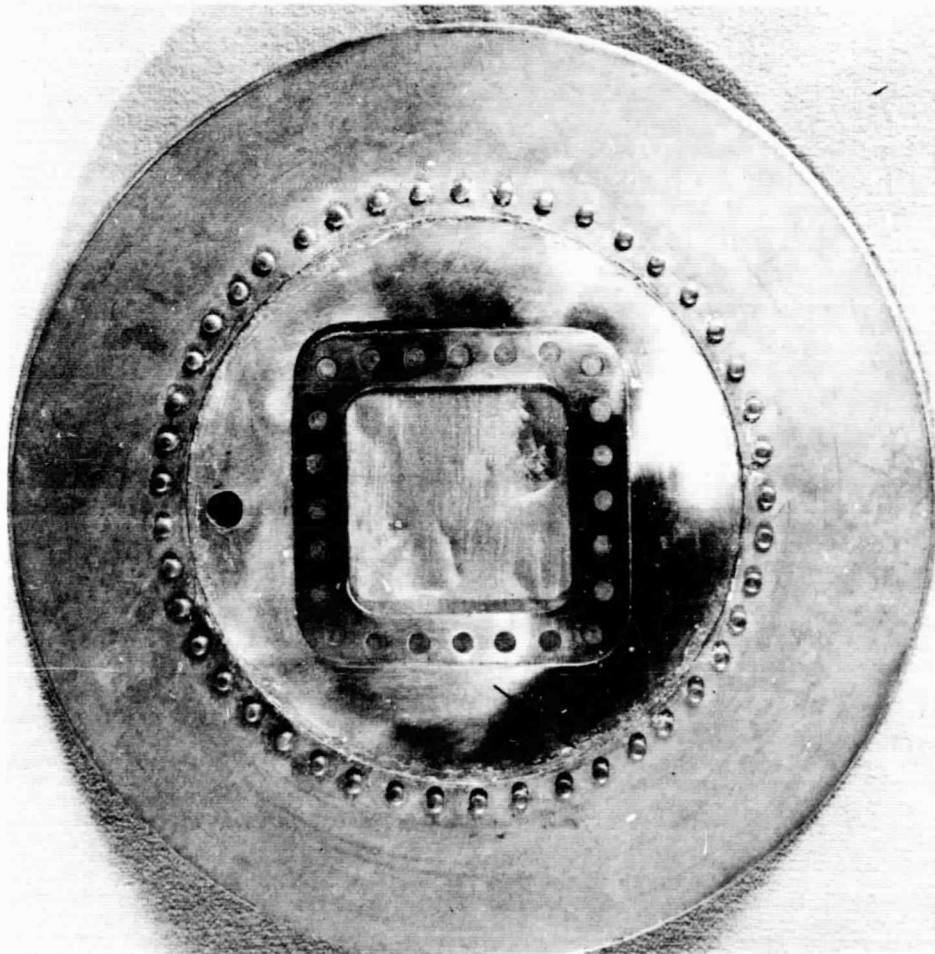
Fuel Trap Assembly Showing Water-Glass Seal After Test
